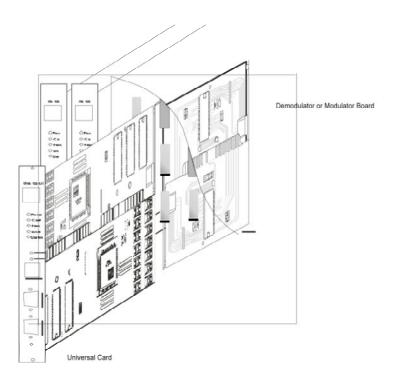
Midplane Cutaway View of WMTS; Universal Card Shown in Cutaway attached to an RF card.
